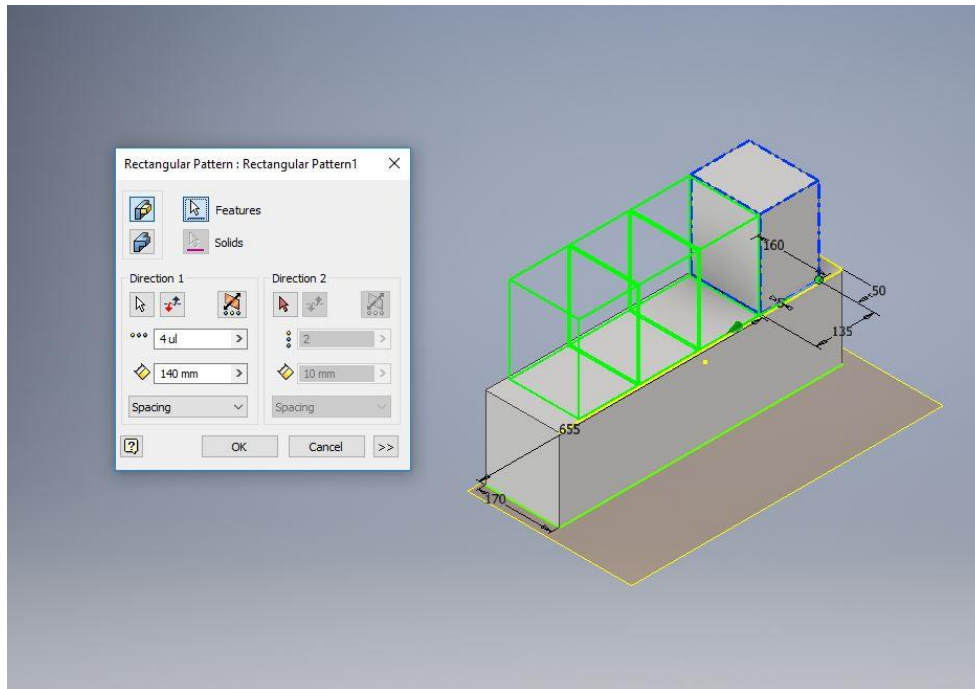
Drawing of the remaining connecting pipes using the “Rectangular Pattern”
